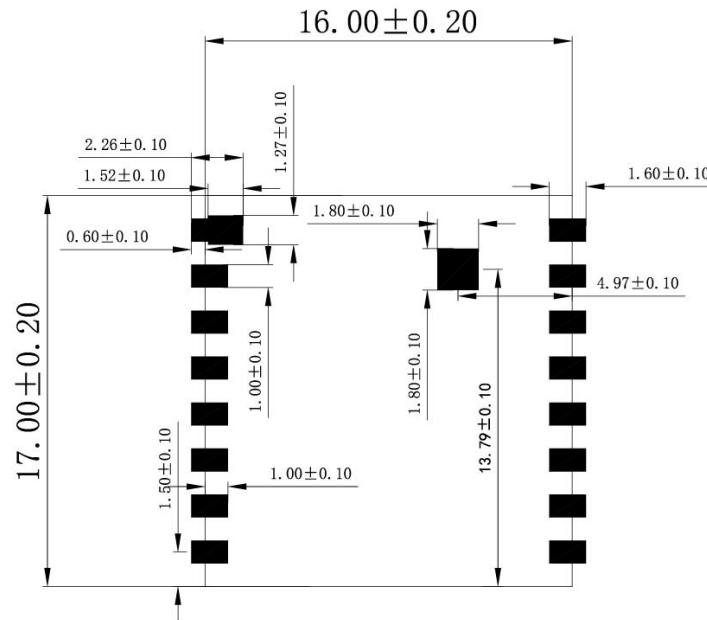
Recommended PCB Footprint Dimensions (Unit: mm)
